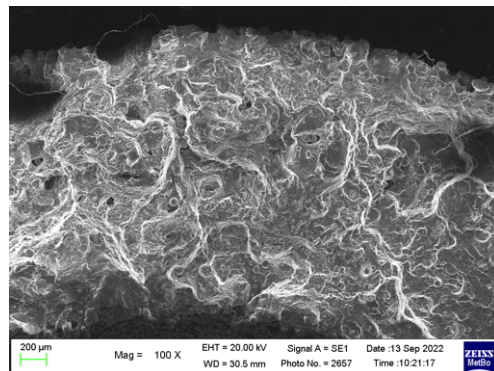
Final fracture surface of a 2.4 mm thick specimen as built
